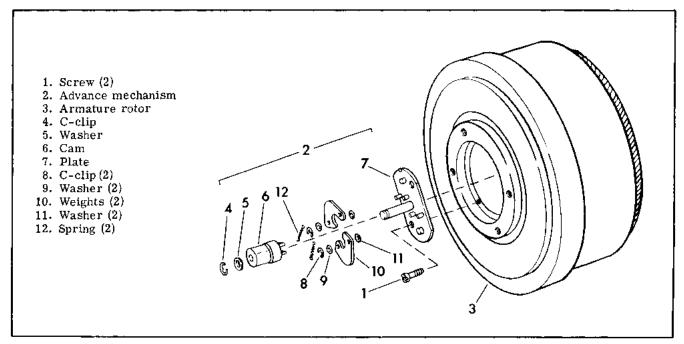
F-13, Circuit Breaker Advance Unit - Exploded View (1963-66 Model D, 1968 & Earlier DC Models)
